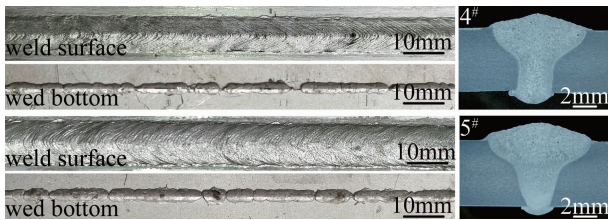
Macroscopic morphology of joints and weld junction under different welding speeds
